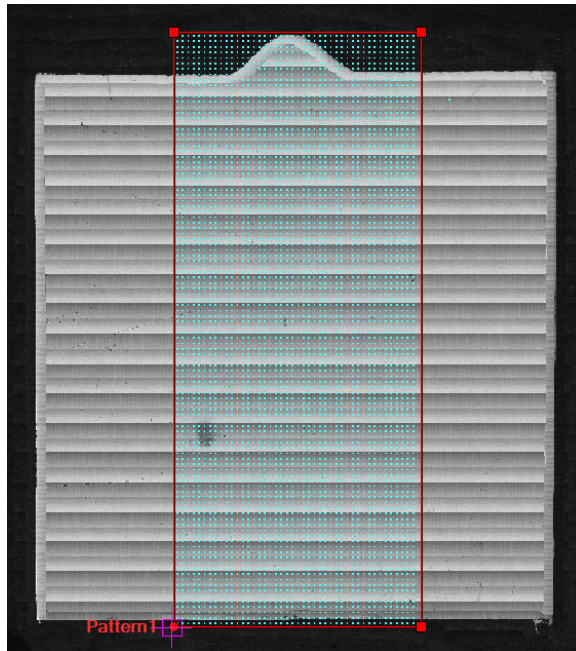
Position of the microhardness measurements across a weld cross section in the similar welding.
